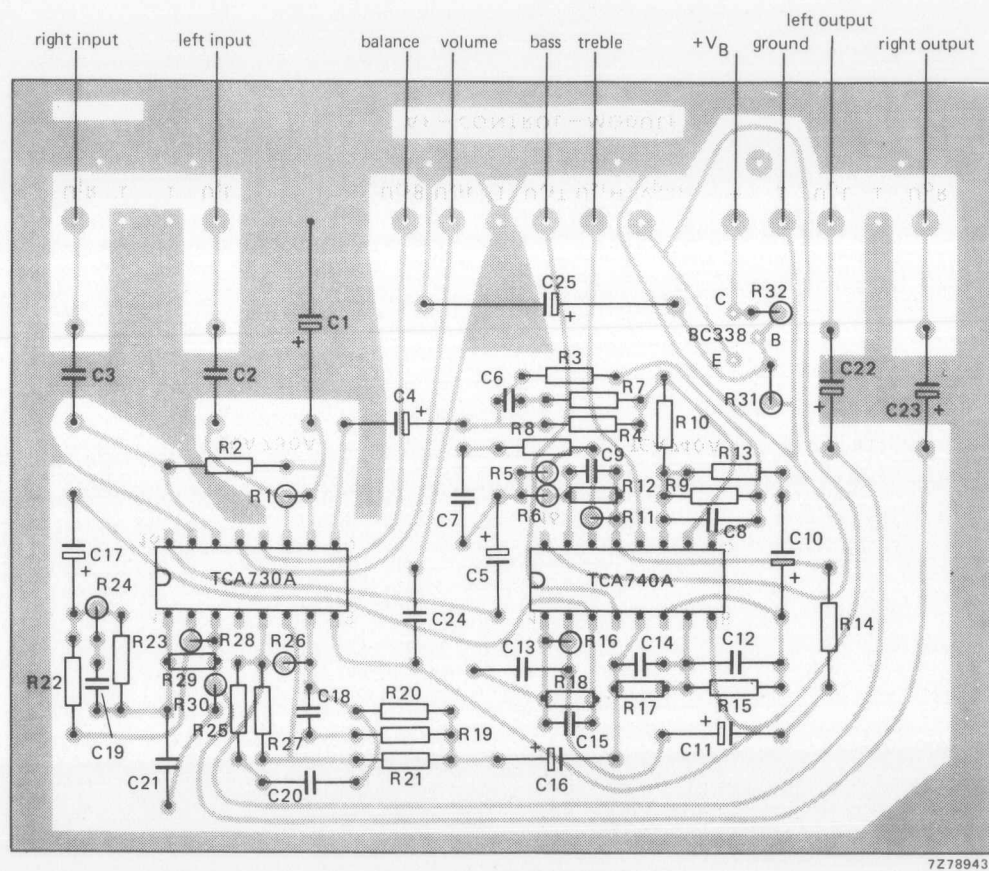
Printed-circuit board component side, showing component layout; for circuit diagram see Fig. 7.
